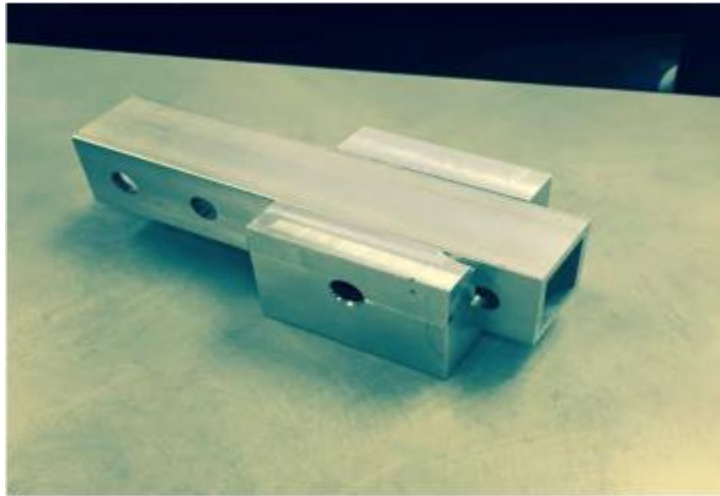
Right side seat adjustment rail system. These parts were manufactured at Santa Clara University and sent to Chavez welding to be welded to the rest of the frame
